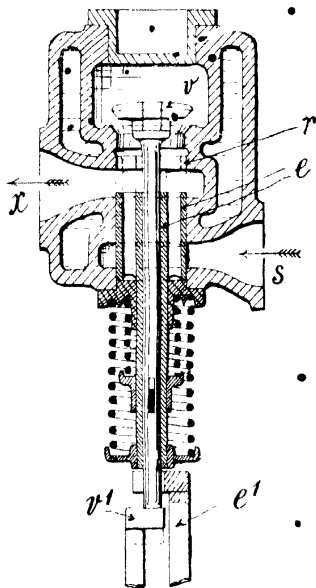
Modified form of combined admission-exhaust valve with separately operated distributor sleeve—Butler
